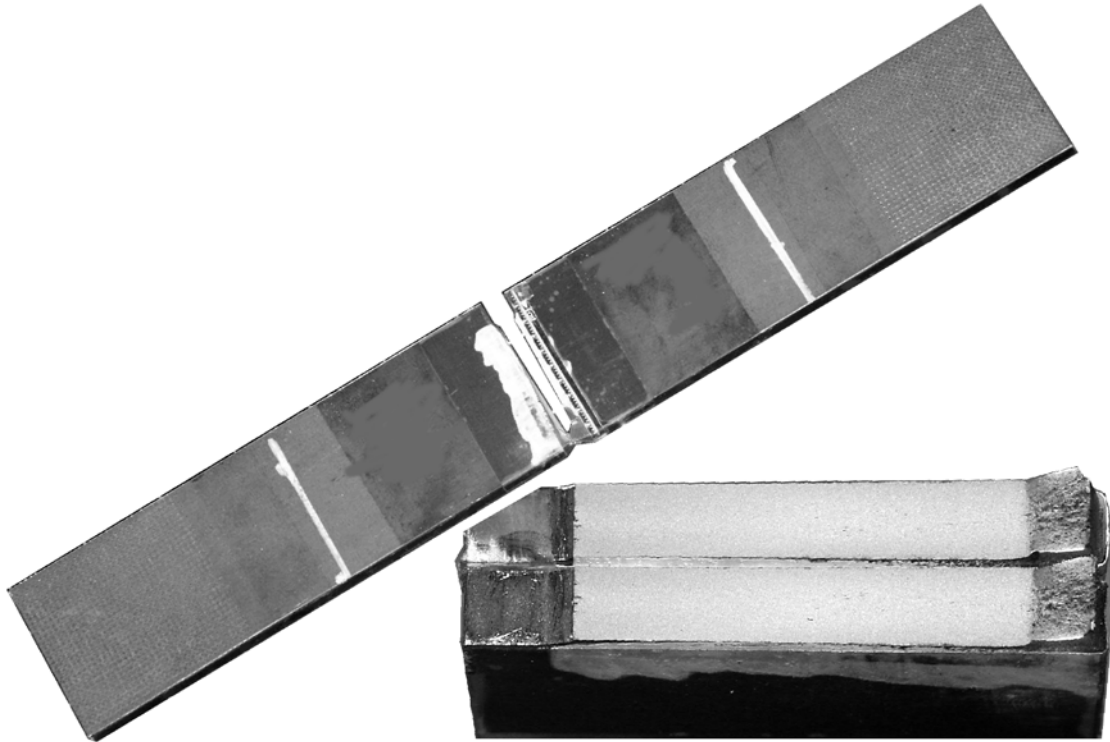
Typical Fractured Crack Growth Rate Specimen
